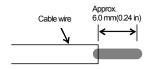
Recommended Strip Length of the Cable Wire End for Terminal Connection
